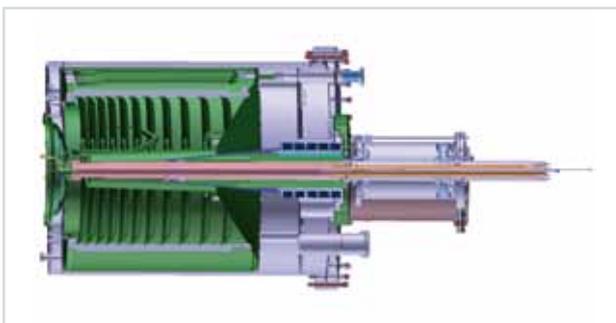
3D CAD model of the prototype torus cryopump. The inlet valve (left) has a diameter of 800 mm.
